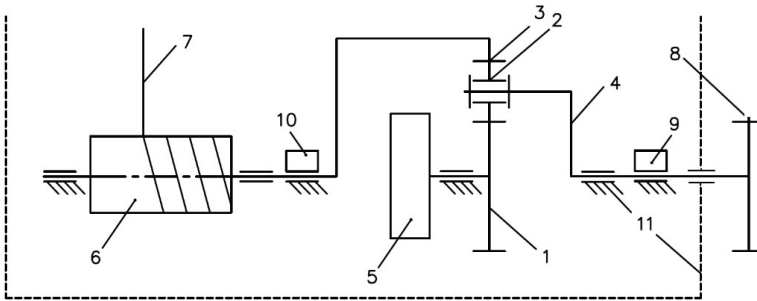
Kinematic diagram of the device: 1 – solar gear; 2 – satellite; 3 – crown wheel; 4 - differential driver; 5 - flywheel; 6 – drum; 7 - cable; 8 – gear transmission. 9 – brake; 10 – drum brake; 11 – container body.
